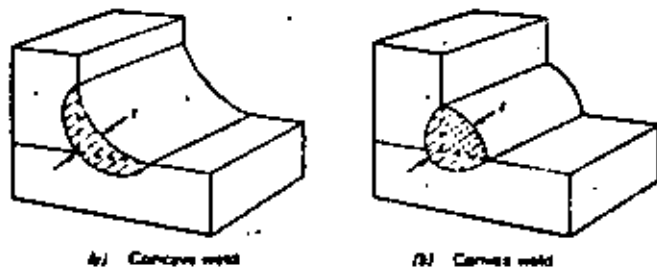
The leg size and the surface of a concave fillet weld (a) may be larger than that of a convex bead (b), but its throat,  $t$ , may be considerably smaller.
